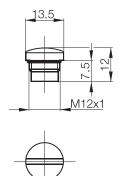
Closing cap BKS 12-CS-01 for BUS OUT
